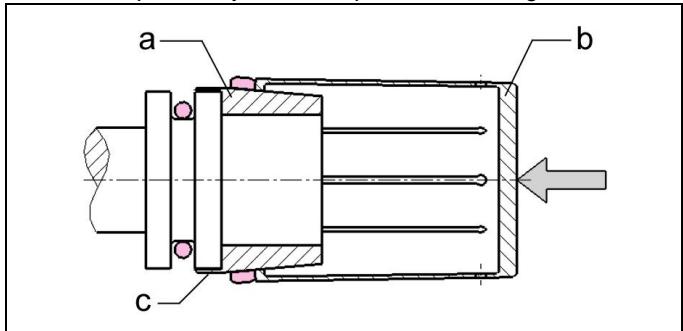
Mounting in a closed slot with expanding and mounting sleeves
